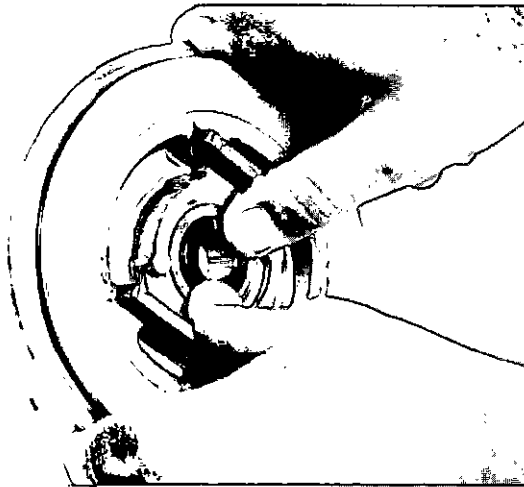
, (T465062). Remove the sleeve from the oil seal plate
